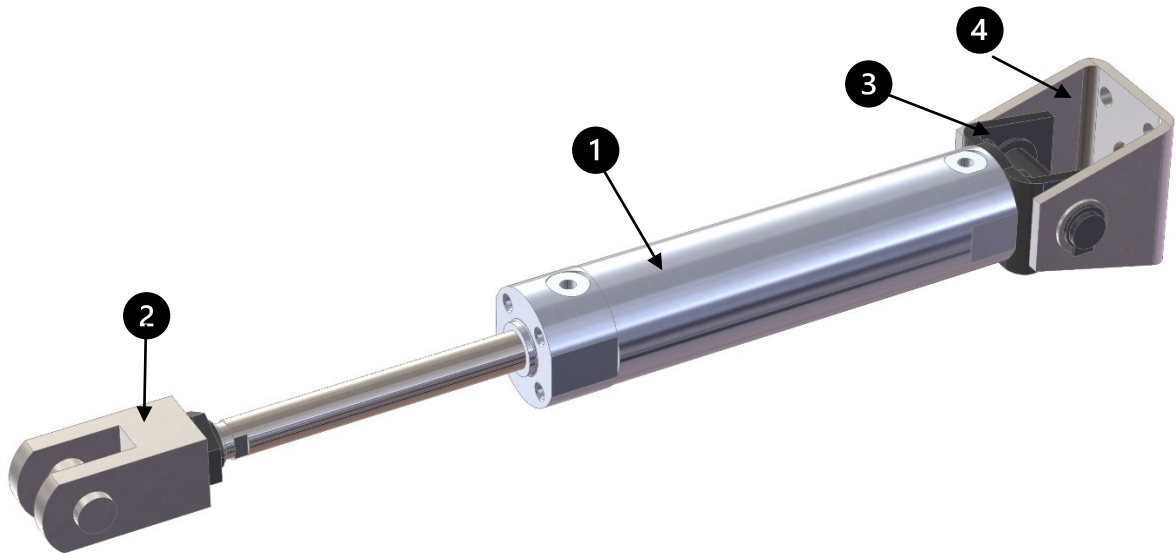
SMC CG3DN25-75 Pneumatic Cylinder. (1) Cylinder. (2) Knuckle joint. (3) Clevis. (4) Pivoting bracket.
